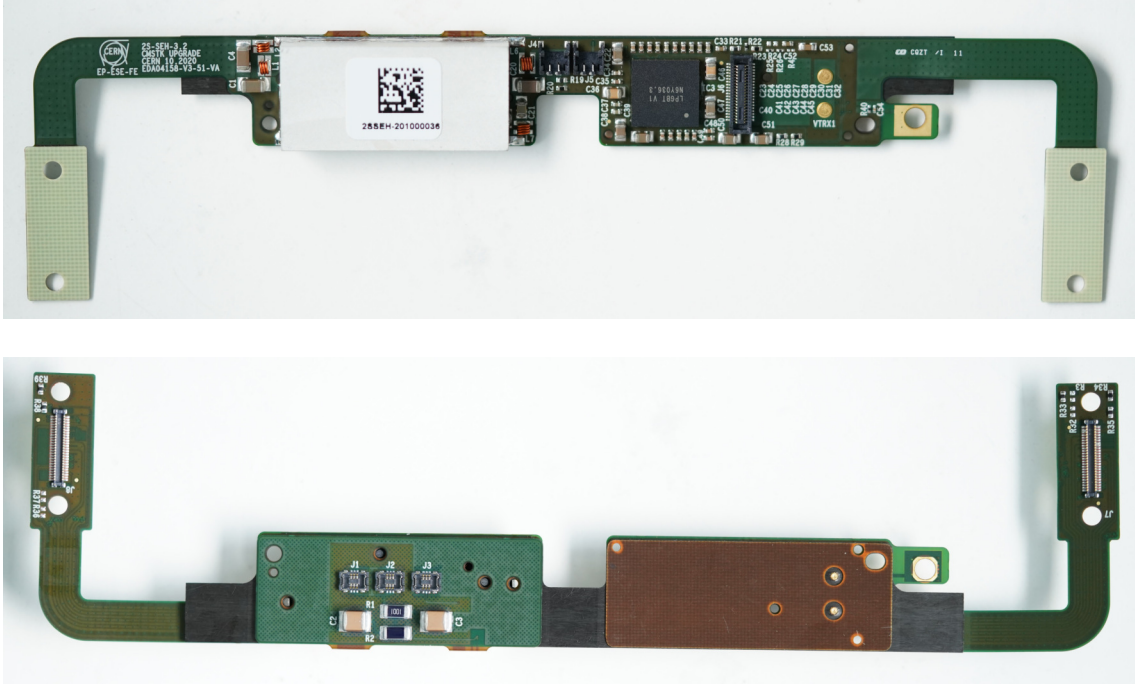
Picture of the top and bottom side of a final Service Hybrid prototype.
